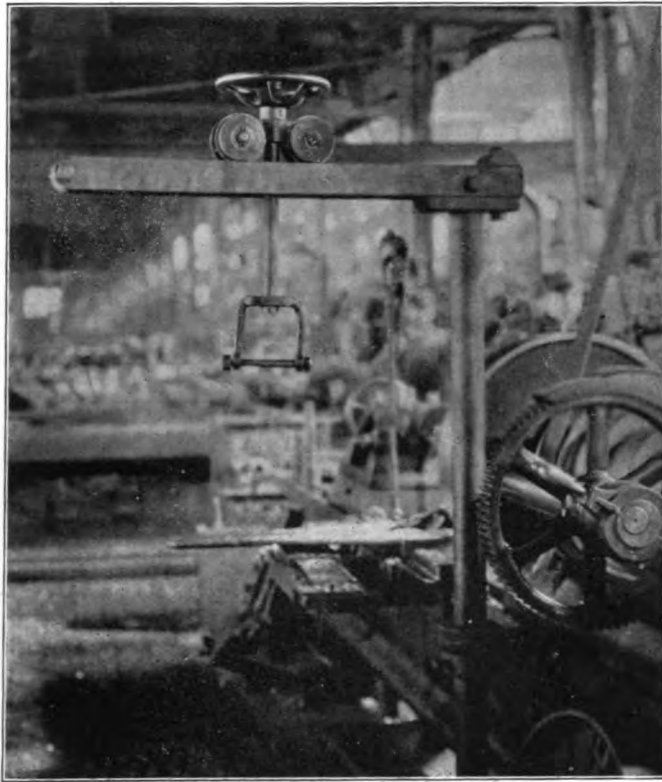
Crane for Removing Heavy Lathe Chucks.
